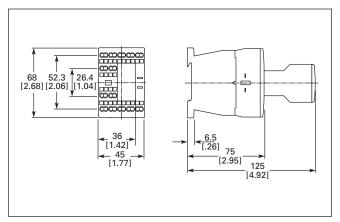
Control Relay with Spring Cage Terminals XTREC with XTCEXFA Auxiliary Contact — Approximate Dimensions in mm [in.]
